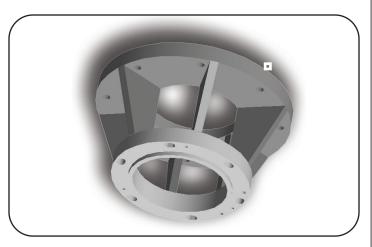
KIT-ADT-43 Motor adaptor assembly designed to fit the ASB-650 table that uses the HR-20S type hydraulic motor
